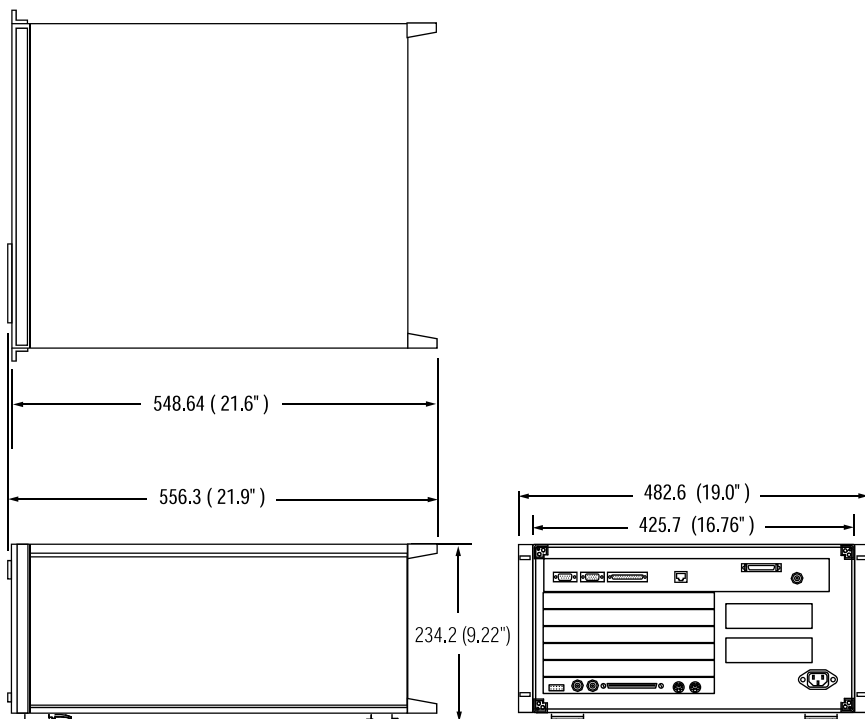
HP 16700A, 16701A and 16702A exterior dimensions. Dimensions: mm (inches).
